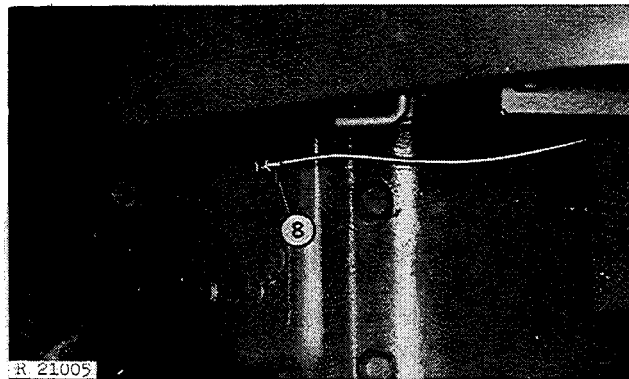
Hydraulic Pump Oil Seal Drain Tube
